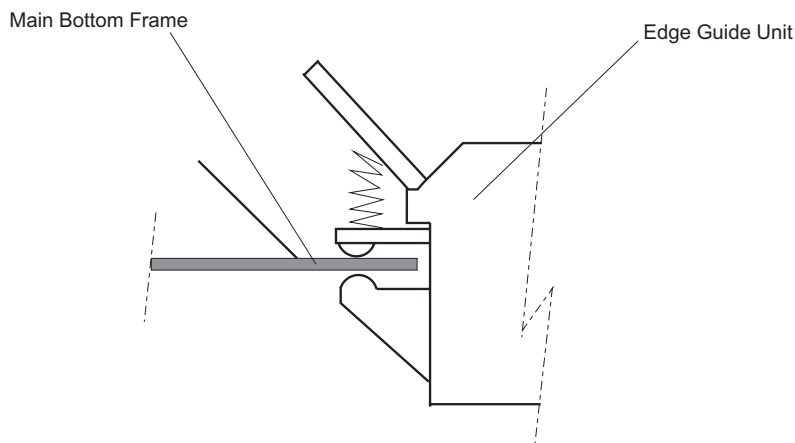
Engagement of the Edge Guide with the Main Bottom Frame
